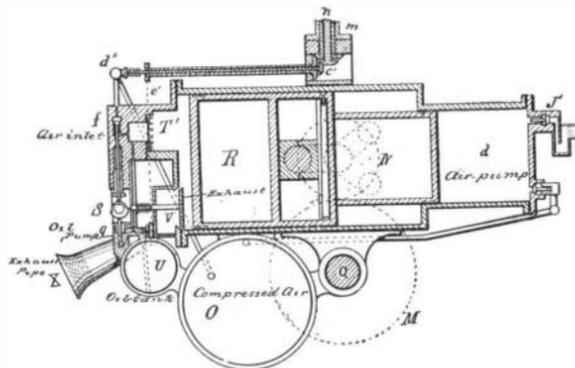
VERTICAL SECTION THROUGH MOTOR.
